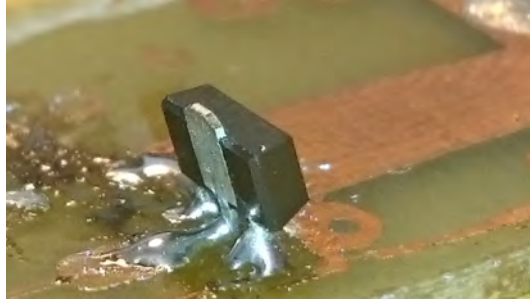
Close-up picture of the soldering technique for the cryogenic buffer. The transistor is soldered in a tilt to avoid mechanical breakdown of the transistor at cryogenic temperature.
